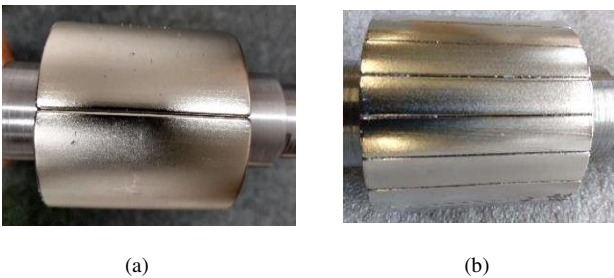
Gap between adjacent magnets due to manufacturing tolerances and assembly error in (a) conventional SPM machine and (b) SPM-V machine.
